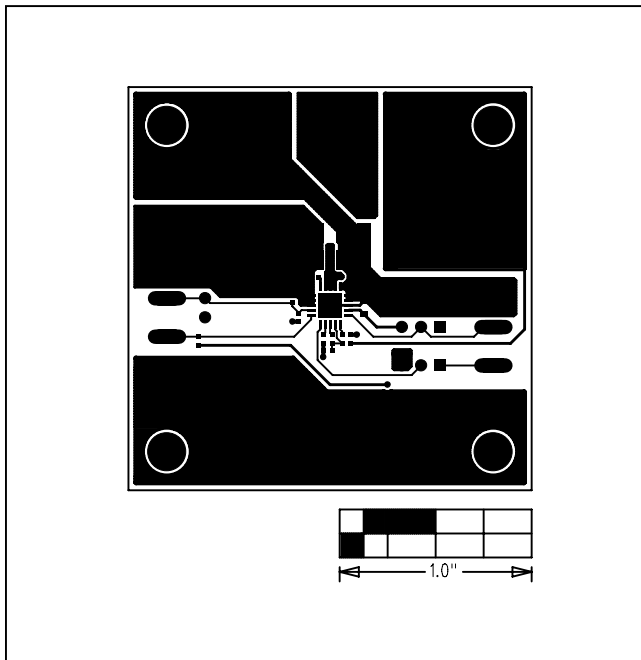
MAX17504 5V Output EV Kit Component Side PCB layout
